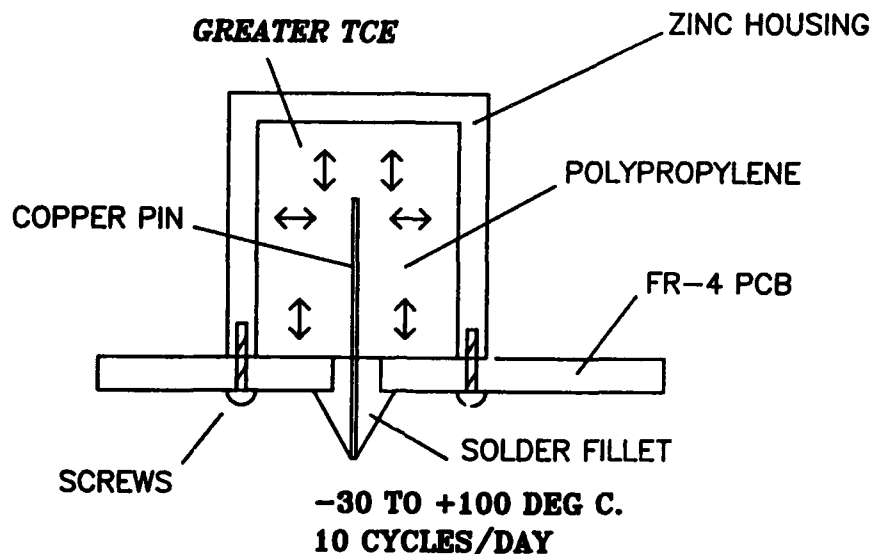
Assemblies to prepare samples for solder characterization. Thermal cycling of this assembly produces excess stress on the solder fillet and causes rapid fatigue.
